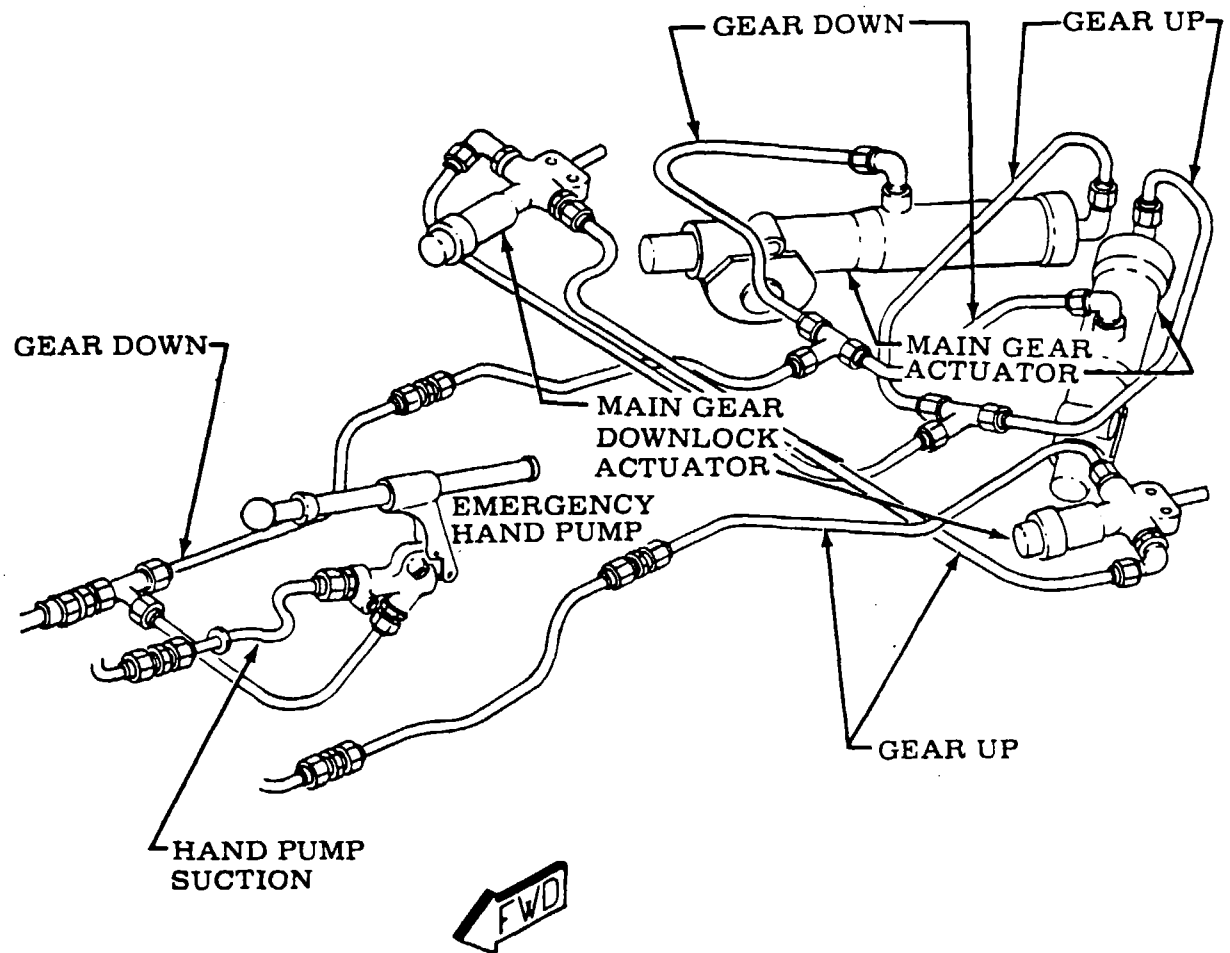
Landing Gear System Component Locator (Sheet 3 of 3)
